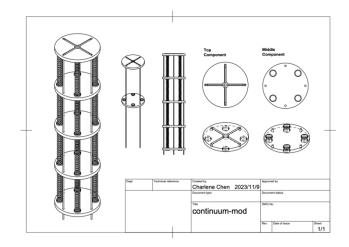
Six DoF Continuum Robot Assembly Drawing.
